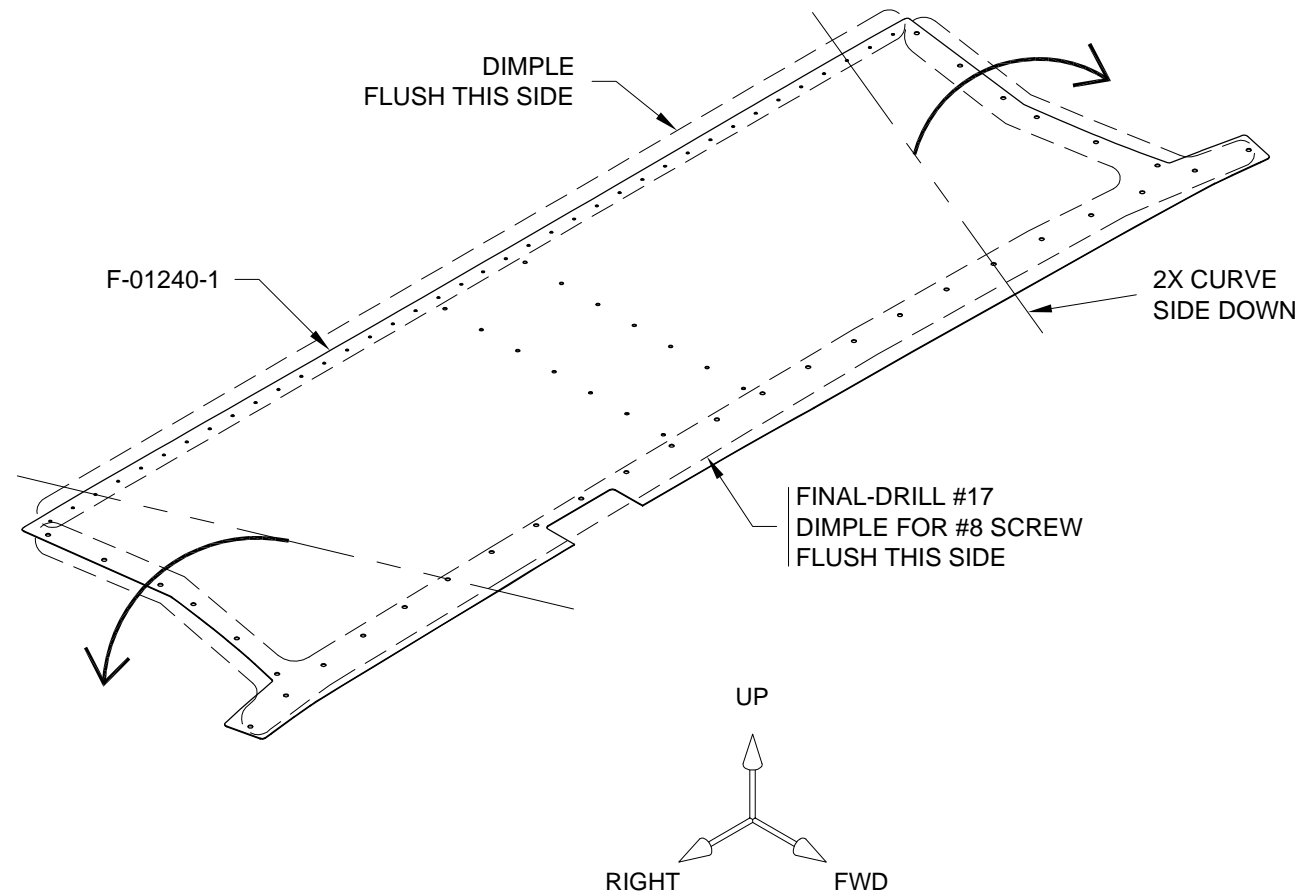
ROLLING THE UPPER FORWARD FUSELAGE SKIN
